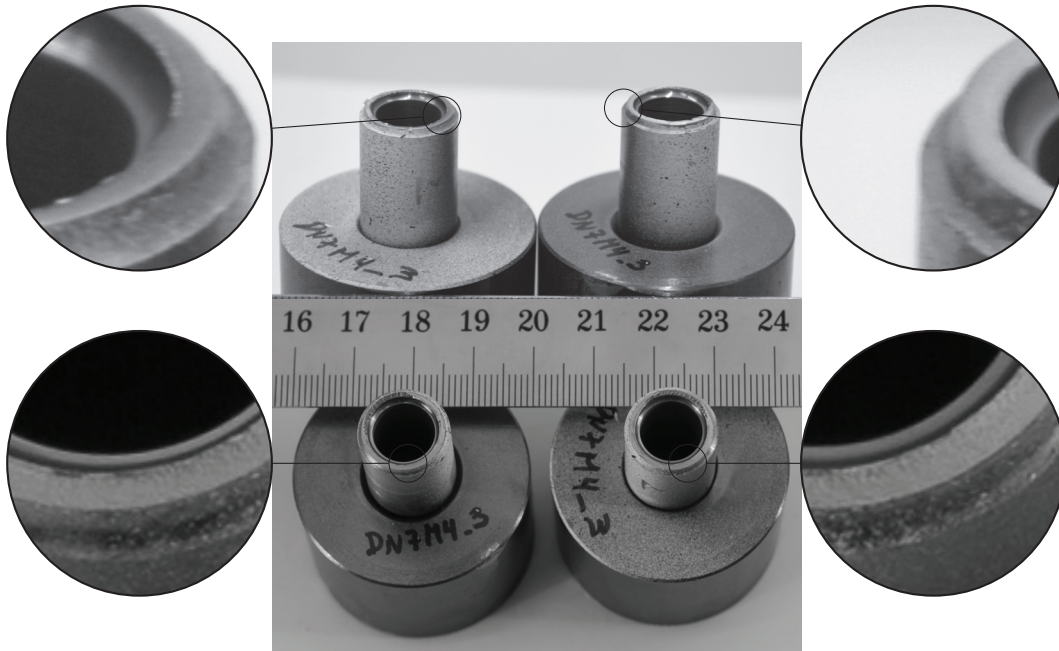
Fracture surface in monotonic for load path 4 in double notched specimens
